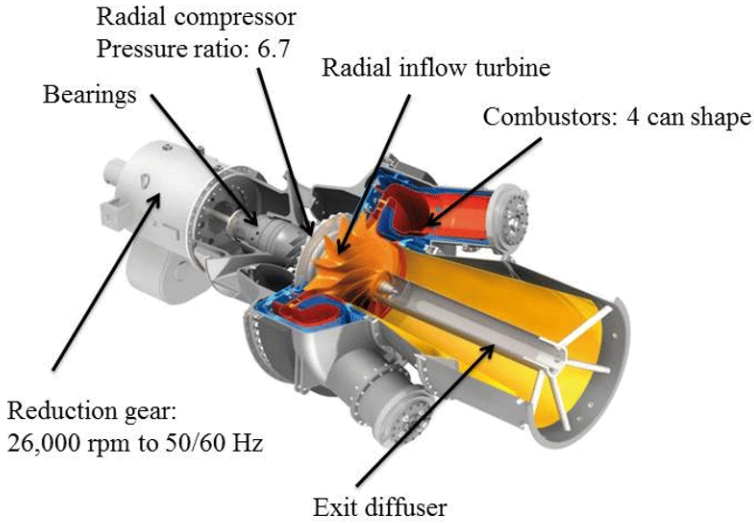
OP16 gas turbine with centrifugal compressor and centripetal turbine.
